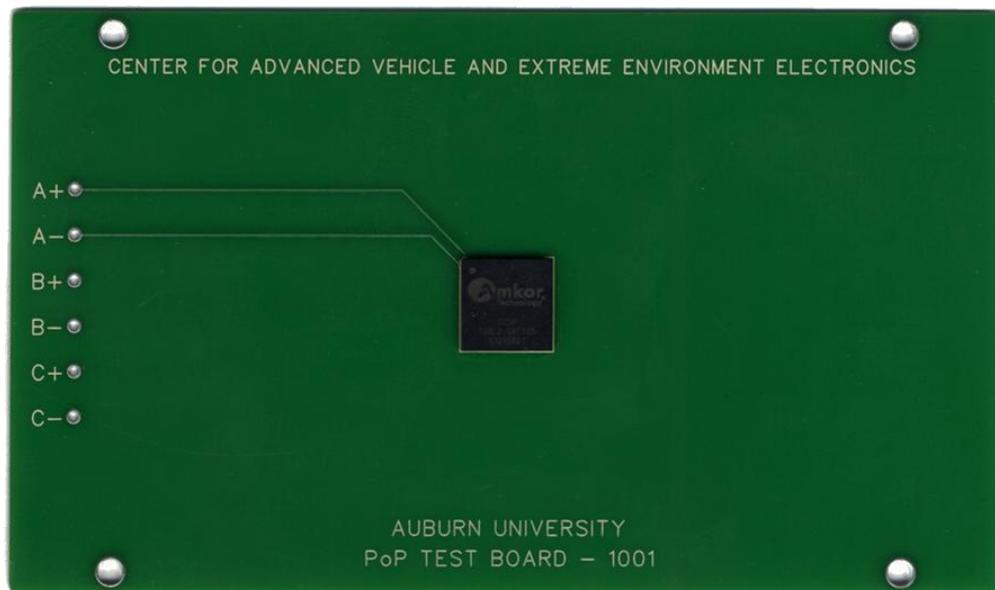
Single component JEDEC standard Package-on-Package test vehicle, fabricated and used for the study.
